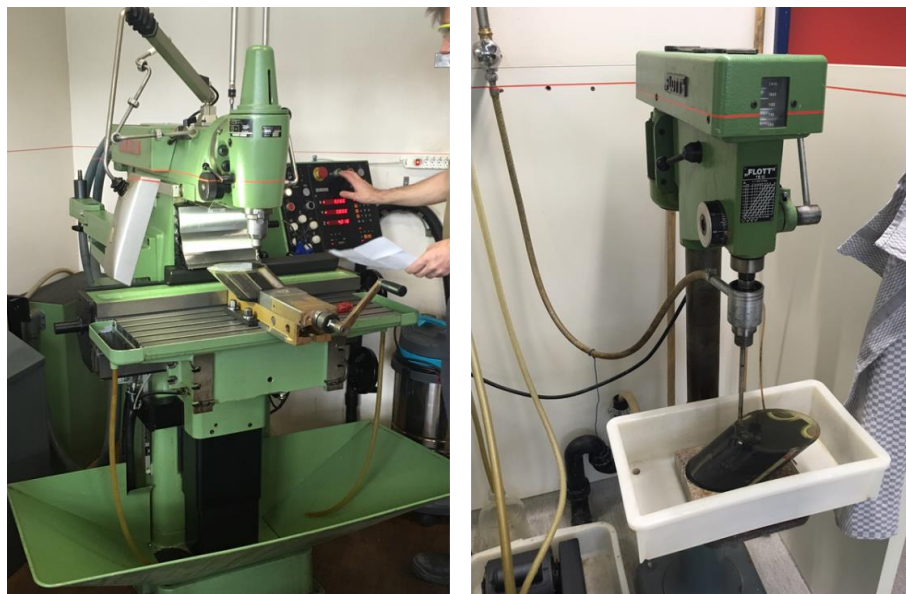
Left: milling machine to place the coordinates on the epoxy; right: core drilling machine operated in dry mode to drill 8 mm cores.
